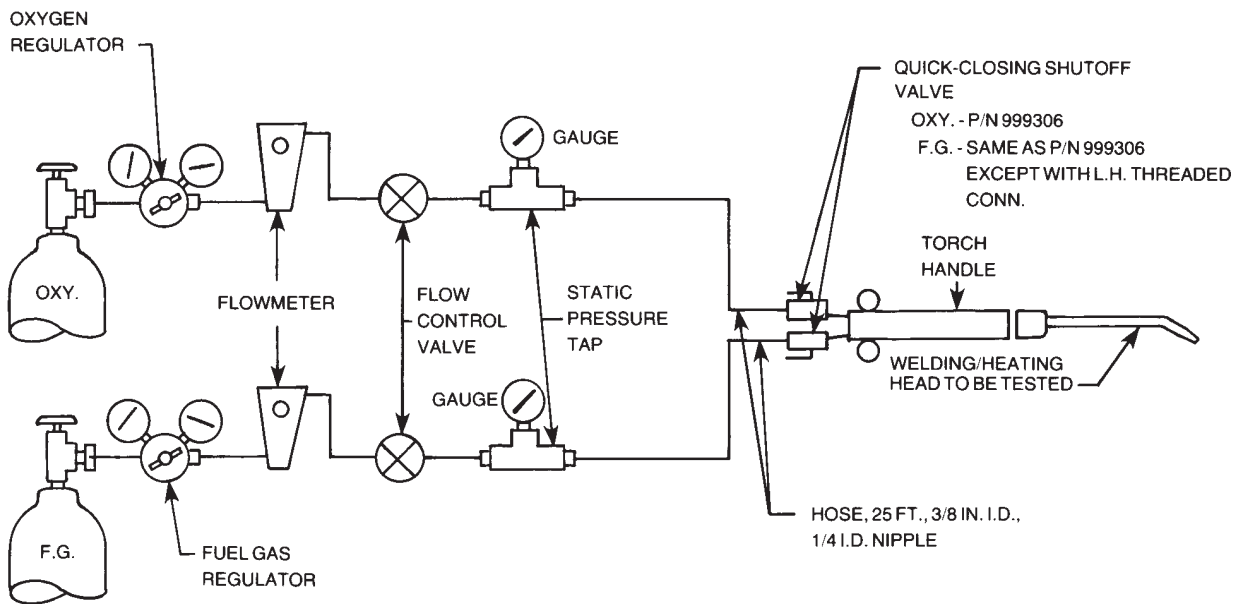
Welding/Heating Head Test Set-Up
